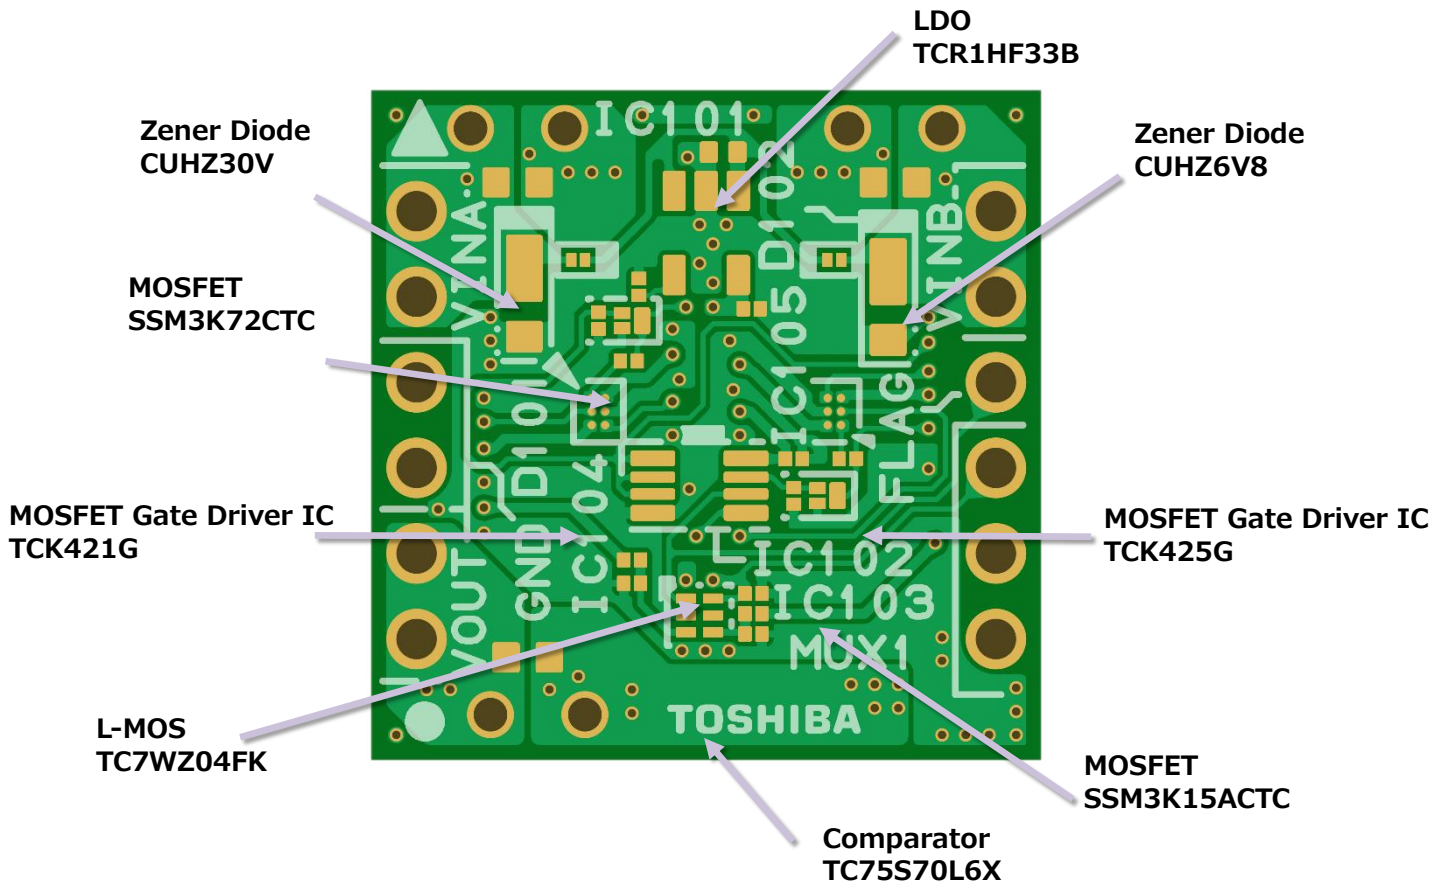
(a) Module Board Main Component Layout (Front Side - Example MUX1)
